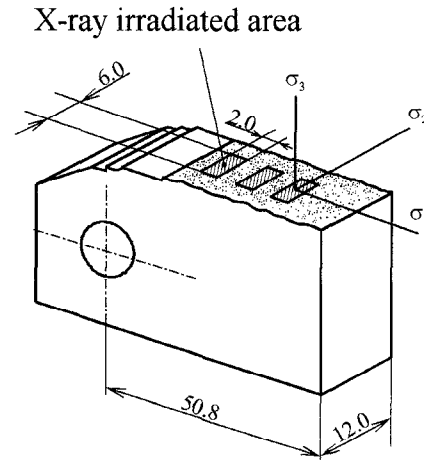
Schematic illustration of X-ray irradiated area on the fracture surface (mm).
